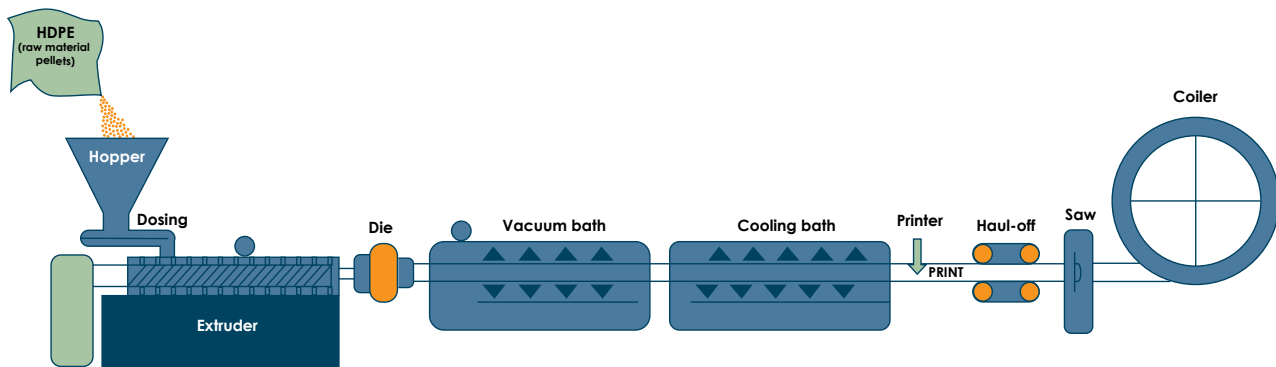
LAYOUT OF A HDPE PIPE EXTRUSION PLANT
